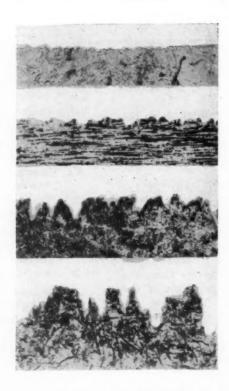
Microphotographs of profiles of typical machined surfaces. From top to bottom the parts and their average roughness values, in microinches, are: connecting - rod bushing, 8; valve stem, 24; cylinder bore, 60; and brake drum, 110. In these photographs, vertical magnification is ten times greater than horizontal
